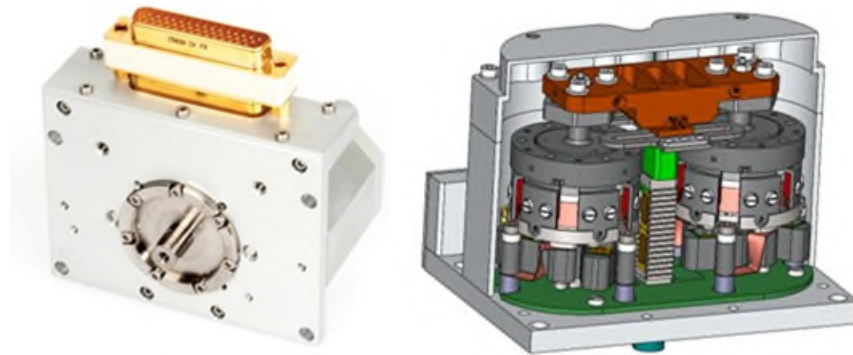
BSMA Engineering Model with connector saver and CAD cut view
